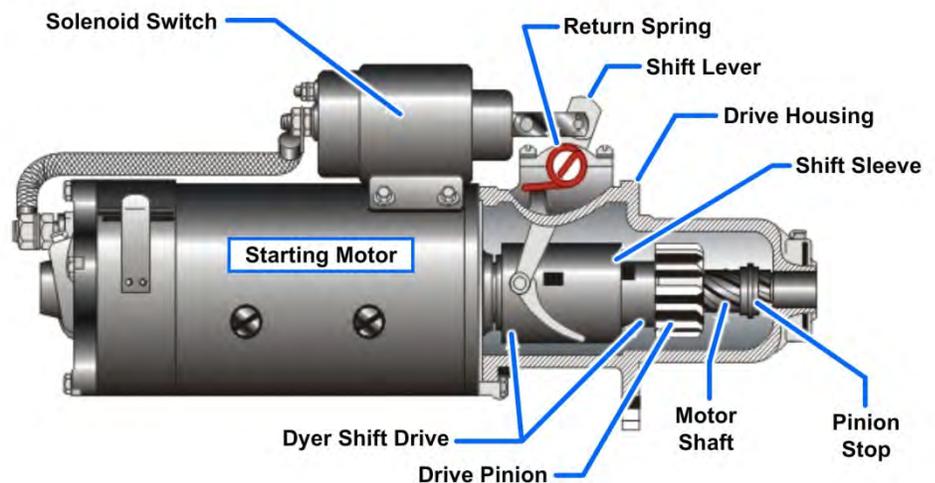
Cross section of starting motor with a Dyer driver.
